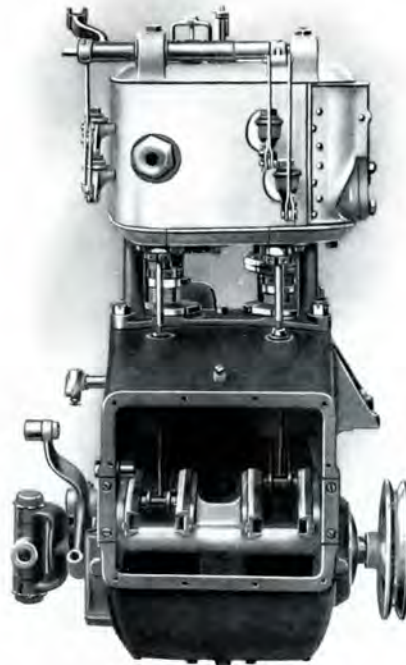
RIGHT SIDE OF THE WHITE STEAM ENGINE, WITH SIDE-PLATE REMOVED FROM THE CRANK-CASE, SHOWING THE VALVE GUIDE
